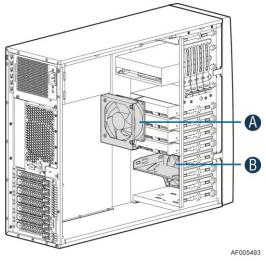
Chassis System Fans to support full length card in Intel<sup>®</sup> Server Chassis P4304SC2SFEN and P4304SC2SHDR
